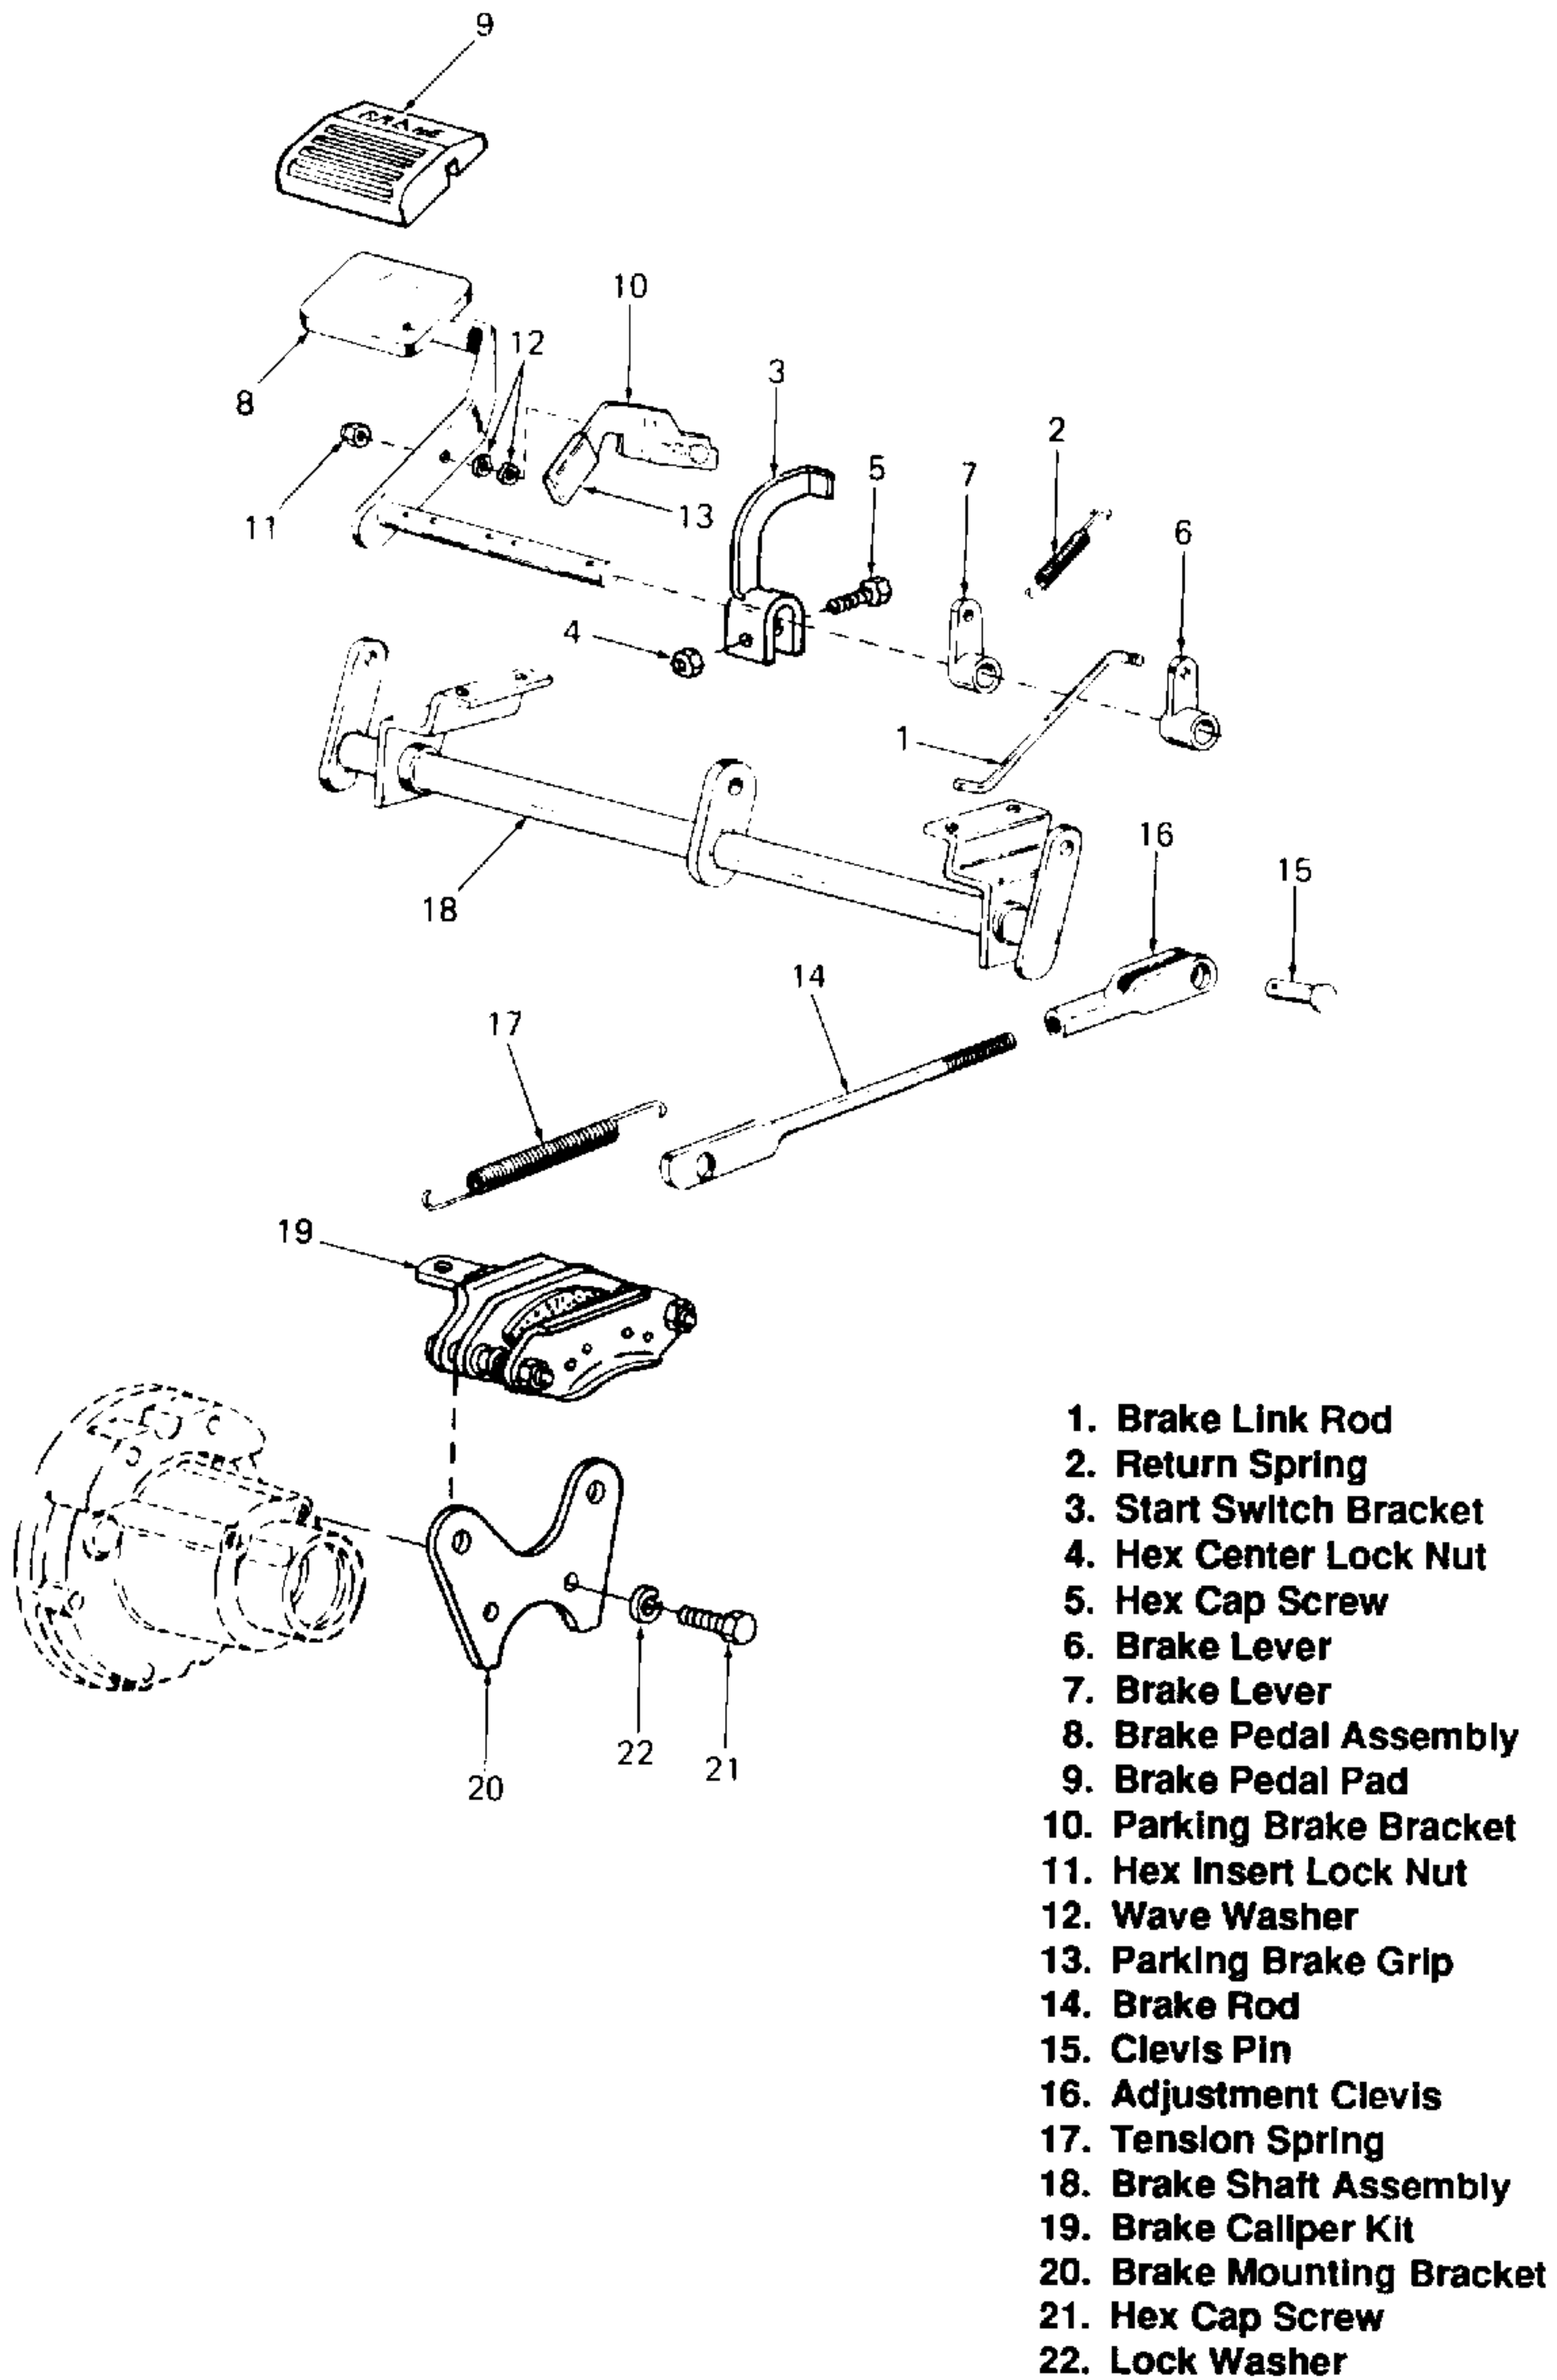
Brakes and Connections (Models 1340, 1541, 1860 and 1862).
